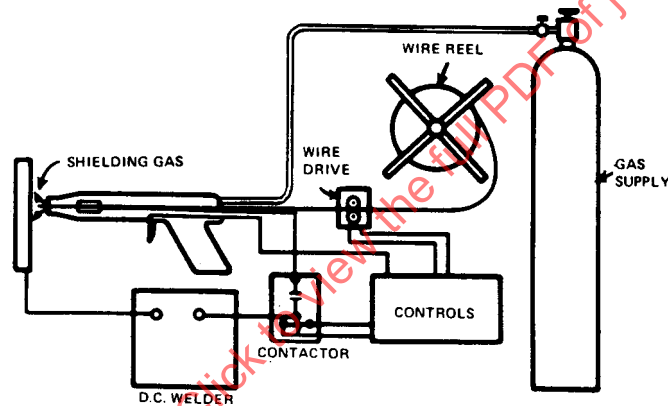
GAS METAL-ARC WELDING PROCESS
